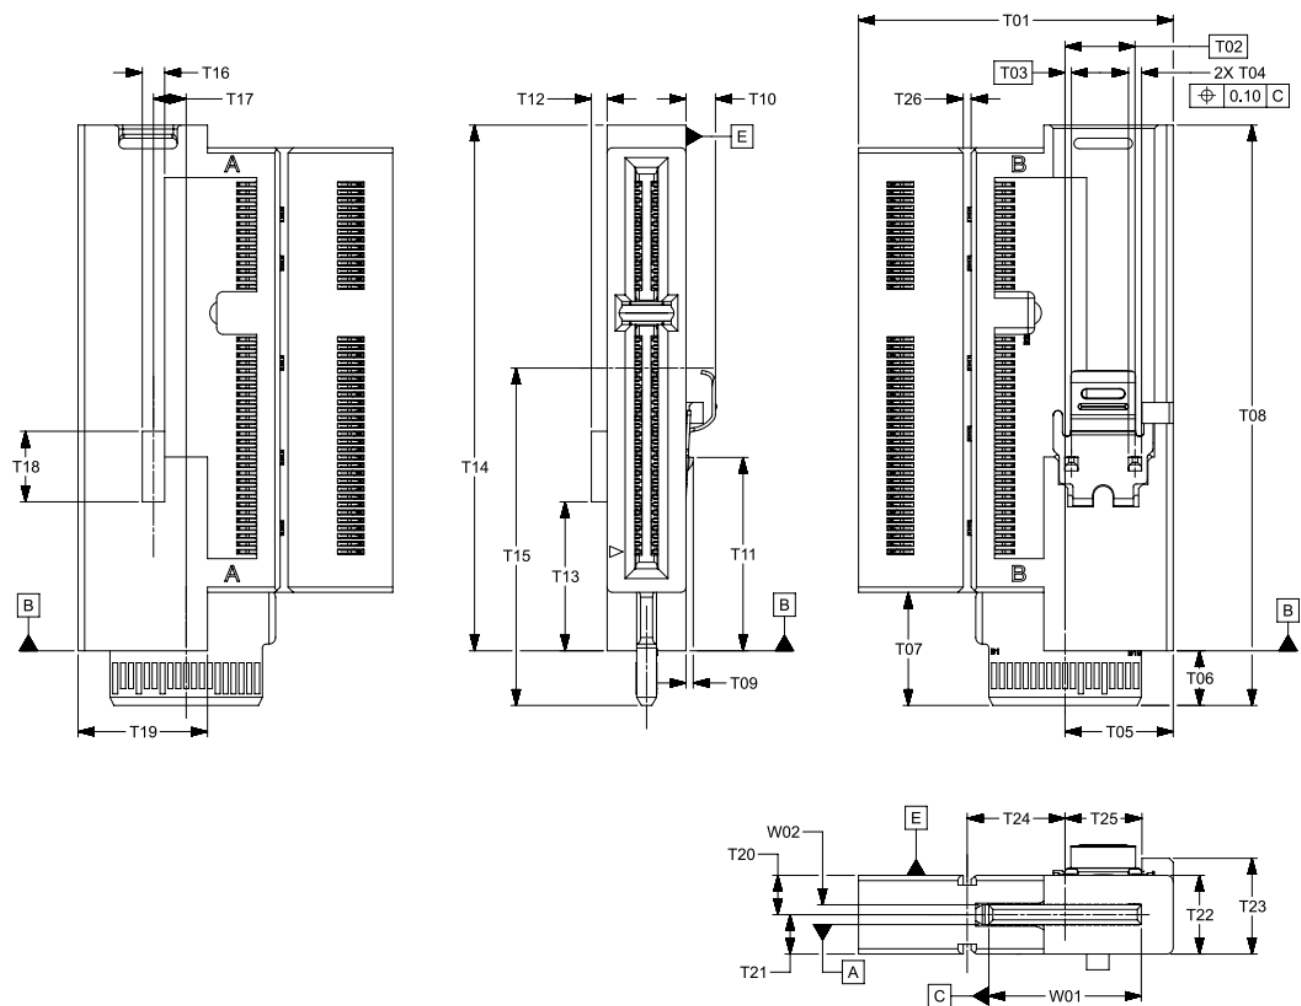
Dimensions of 38-Pin Style B Connector Plug E3-2C
